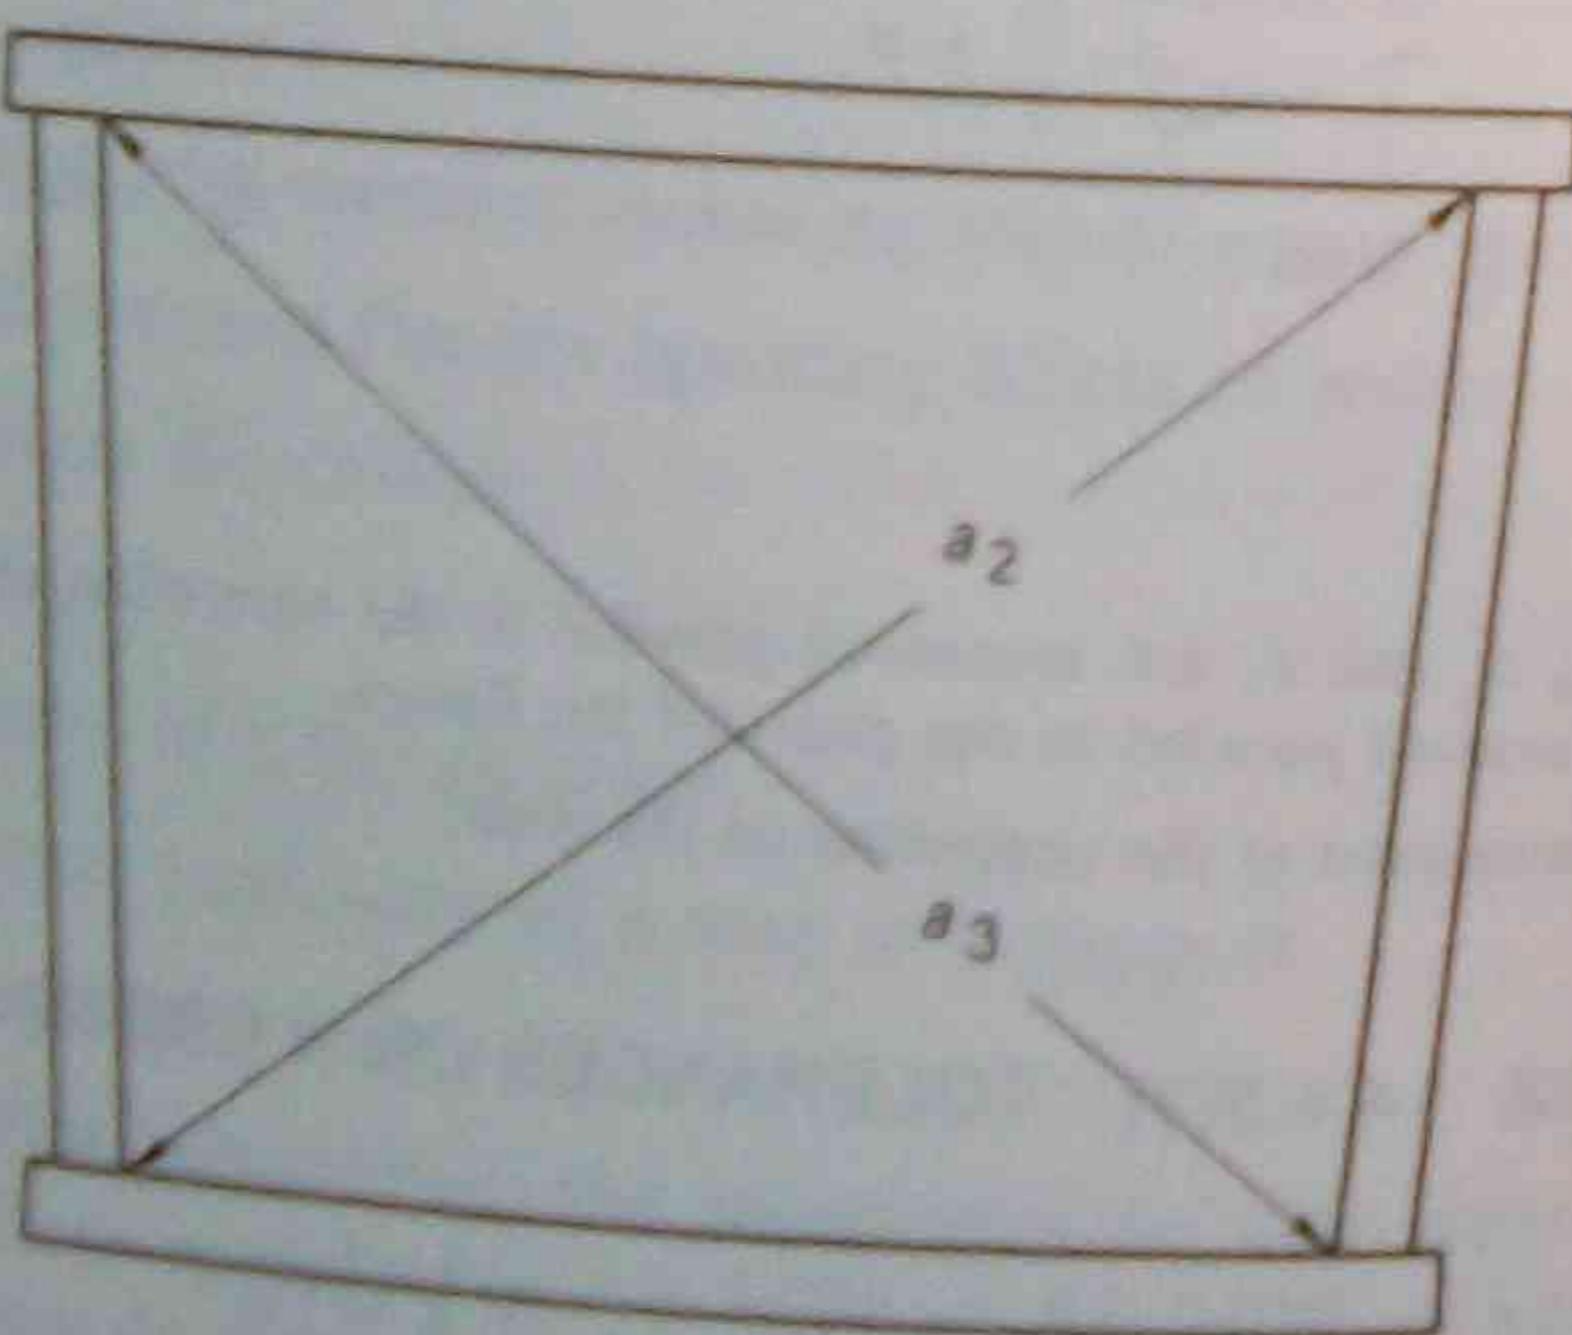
(3) TOLERANCE ON SHAPE OF A BOX SECTION
